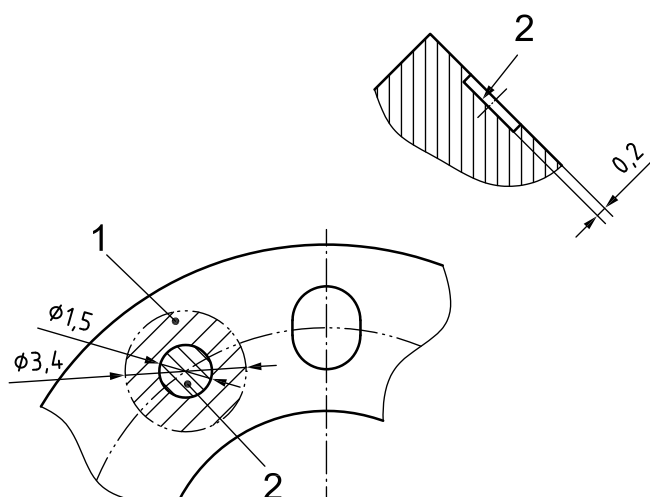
Head plate — Design of the contact area for fluidic coupling elements
